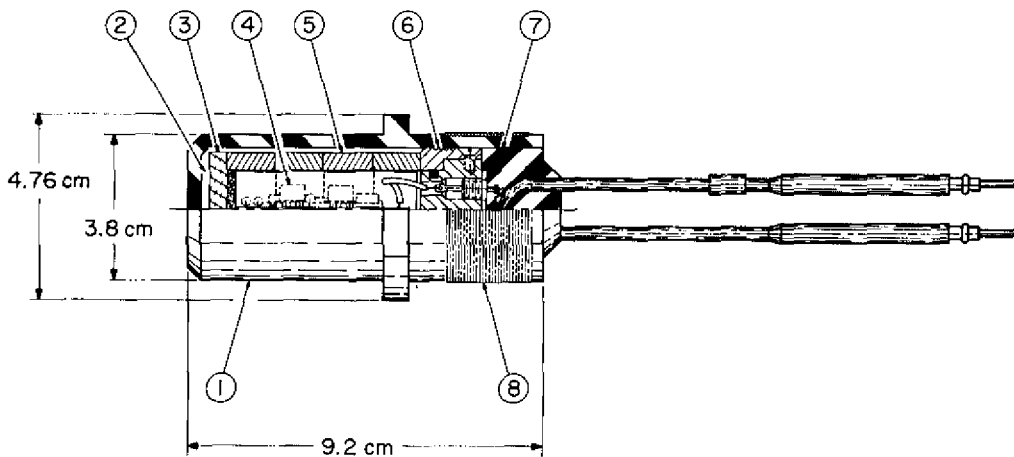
USRD type H78A hydrophone: (1) butyl rubber boot with integral mount ring, (2) coupling fluid, (3) aluminum oxide end cap, (4) preamplifier, (5) ceramic sensor, (6) end ring, (7) cable assembly, and (8) banding
